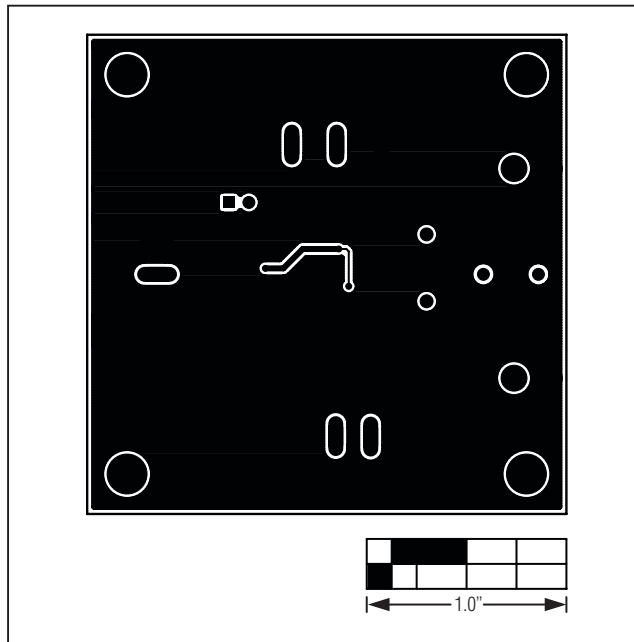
MAX97220A EV Kit PCB Layout—Solder Side
